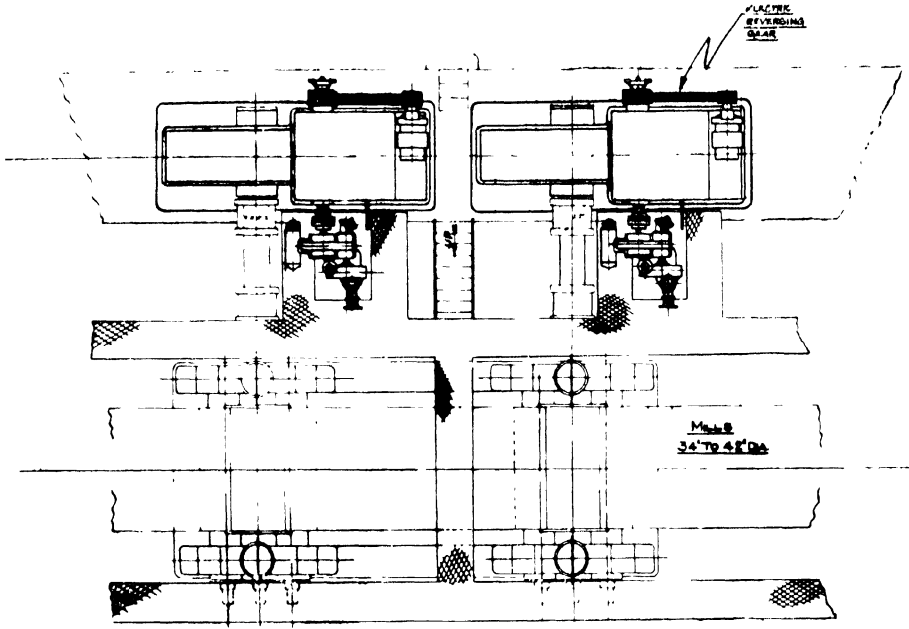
Composite Turbine and Gearing driving Individual Mills.
